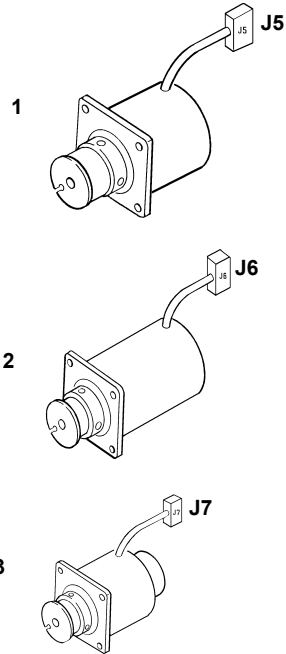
X, Y, and Z-Axis Motor Assemblies
